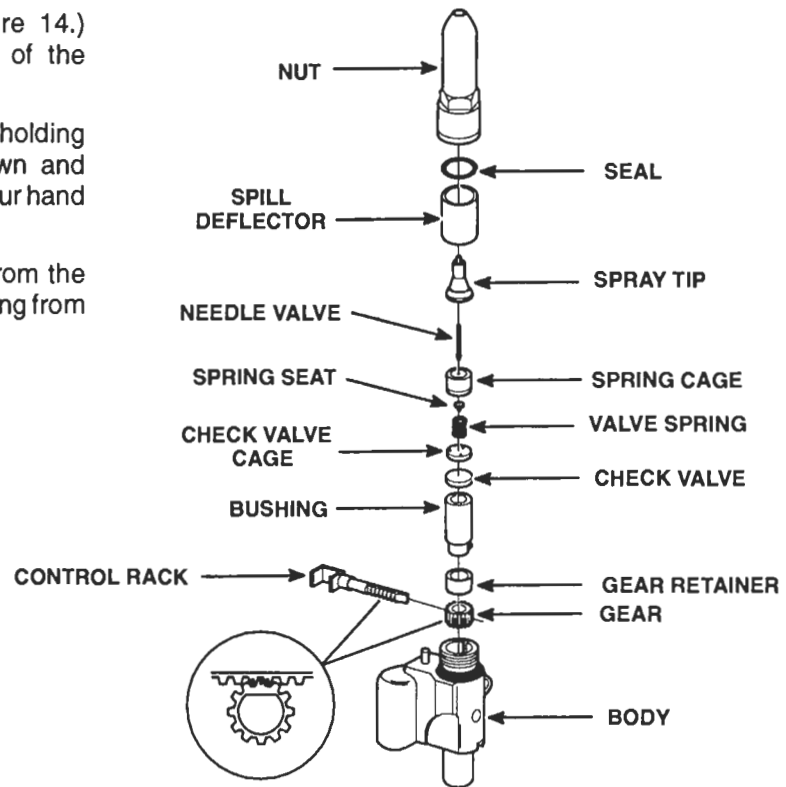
Injector Rack, Gear, Spray Tip and Valve Parts
